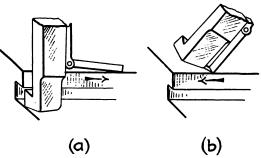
Shows tool lifter, a, cutting stroke, b, return stroke.
